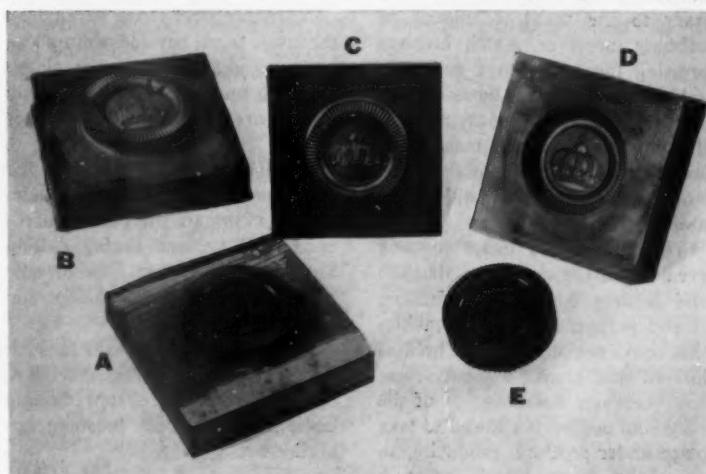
Steps in the production of a hot-hobbed beryllium copper mold. Clockwise A) master pattern to make mold for cast steel hob; B) steel hob after casting; C) finished steel hob; D) beryllium copper hobbing; E) part produced in beryllium copper mold.
